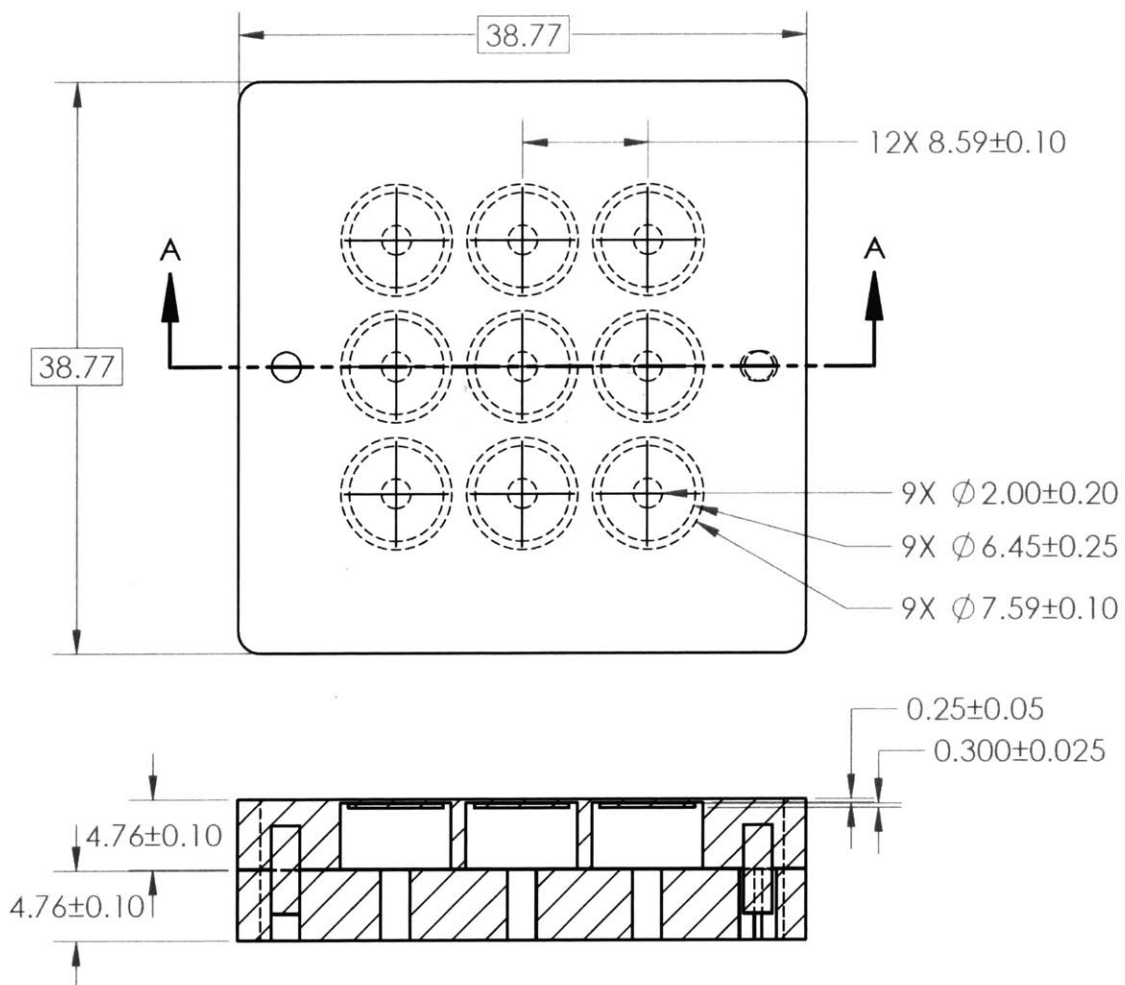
Dimensioned drawing of array prototype. Dimensions are in millimeters.
